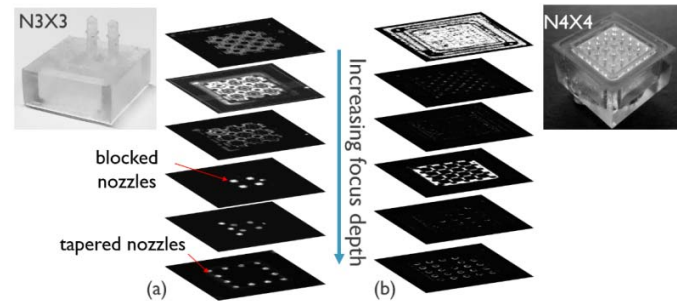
Defect measurements of the 3-D printed coolers using SAM inspection. (a) Printed cooler with blocked nozzles and tapered nozzles. (b) Printed cooler without blocked nozzles.
